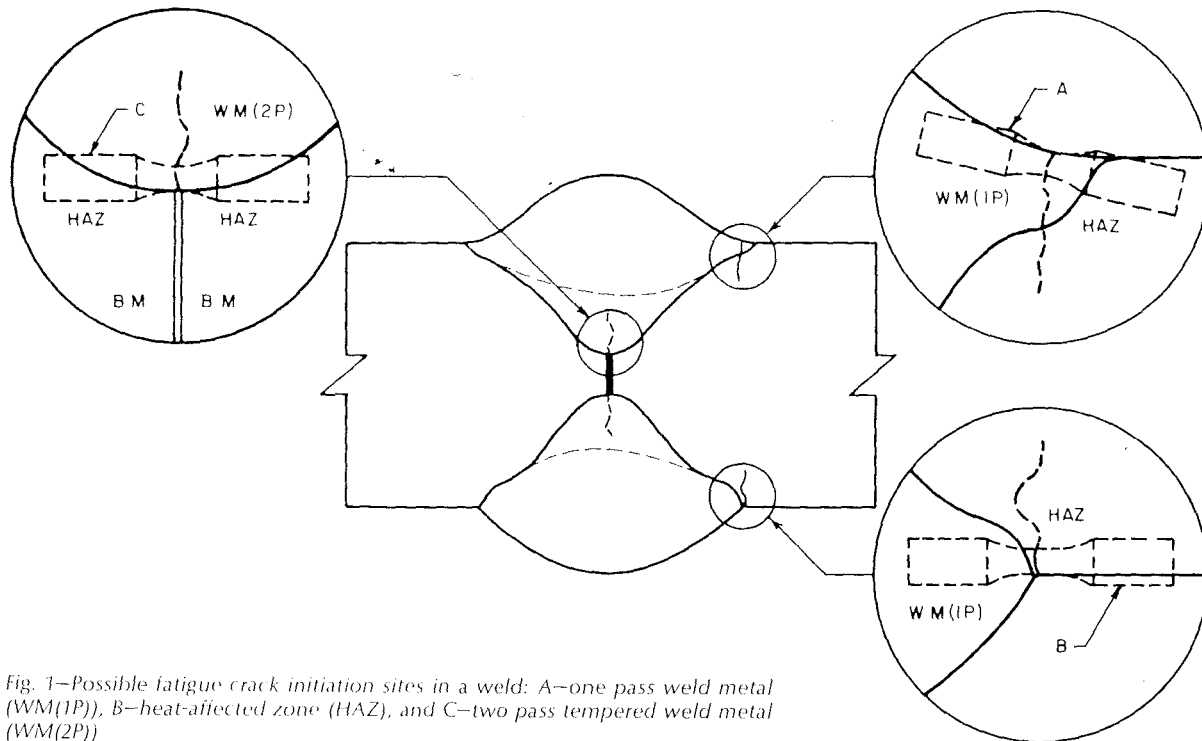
Possible fatigue crack initiation sites in a weld: A—one pass weld metal (WM(1P)), B—heat-affected zone (HAZ), and C—two pass tempered weld metal (WM(2P))
